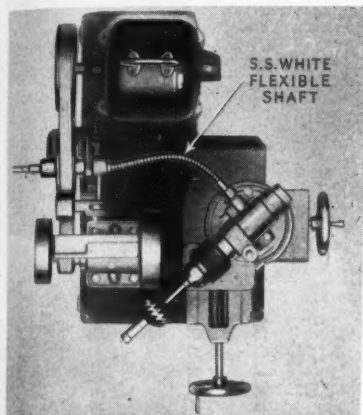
Transmitting Power at an Angle. Here is a plan view of a valve grinding machine, in which a flexible shaft is used to transmit power to a spindle which, to accommodate the various sizes of work, may be moved in any one of three directions.
